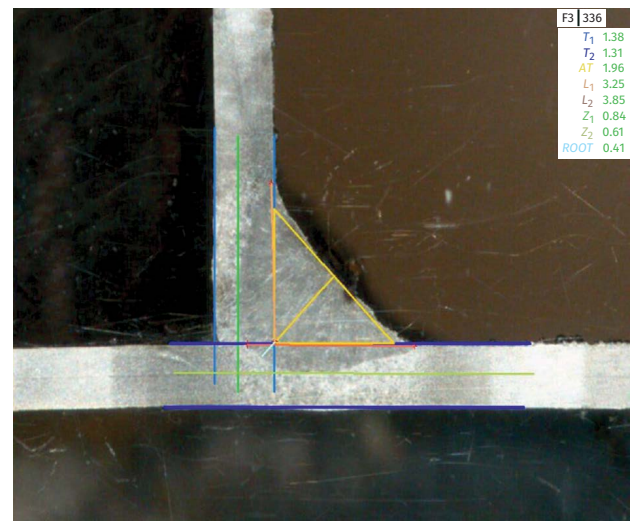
Monitored weld parameters – transverse metallographic cutting: T_1 – thinner BM; T_2 – thicker BM; AT – weld height; L_1 – weld length in T_1 ; L_2 – weld length in T_2 ; Z_1 – penetration (weld) to T_1 ; Z_2 – penetration (weld) to T_2 ; $ROOT$ – weld root
